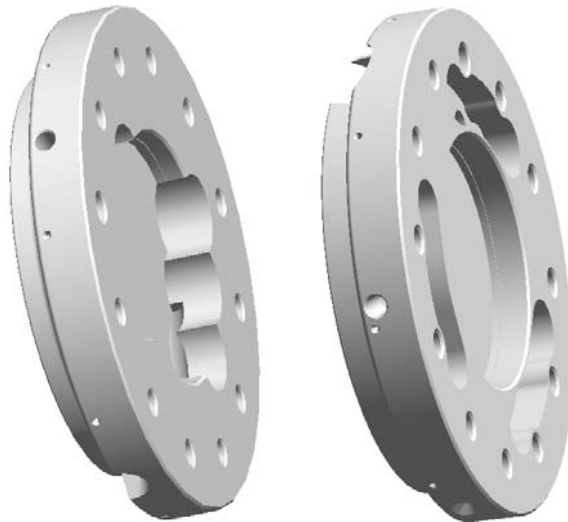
Seven holes on a radius of x mm from axis 6 center on the two insulated tool flanges.
